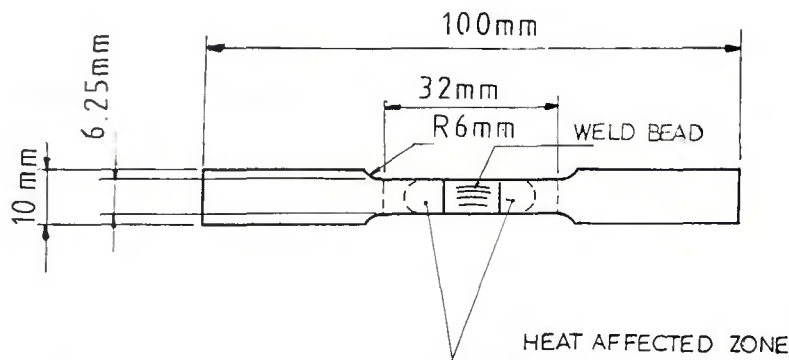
Smooth tensile specimen used for testing GTA welds.
